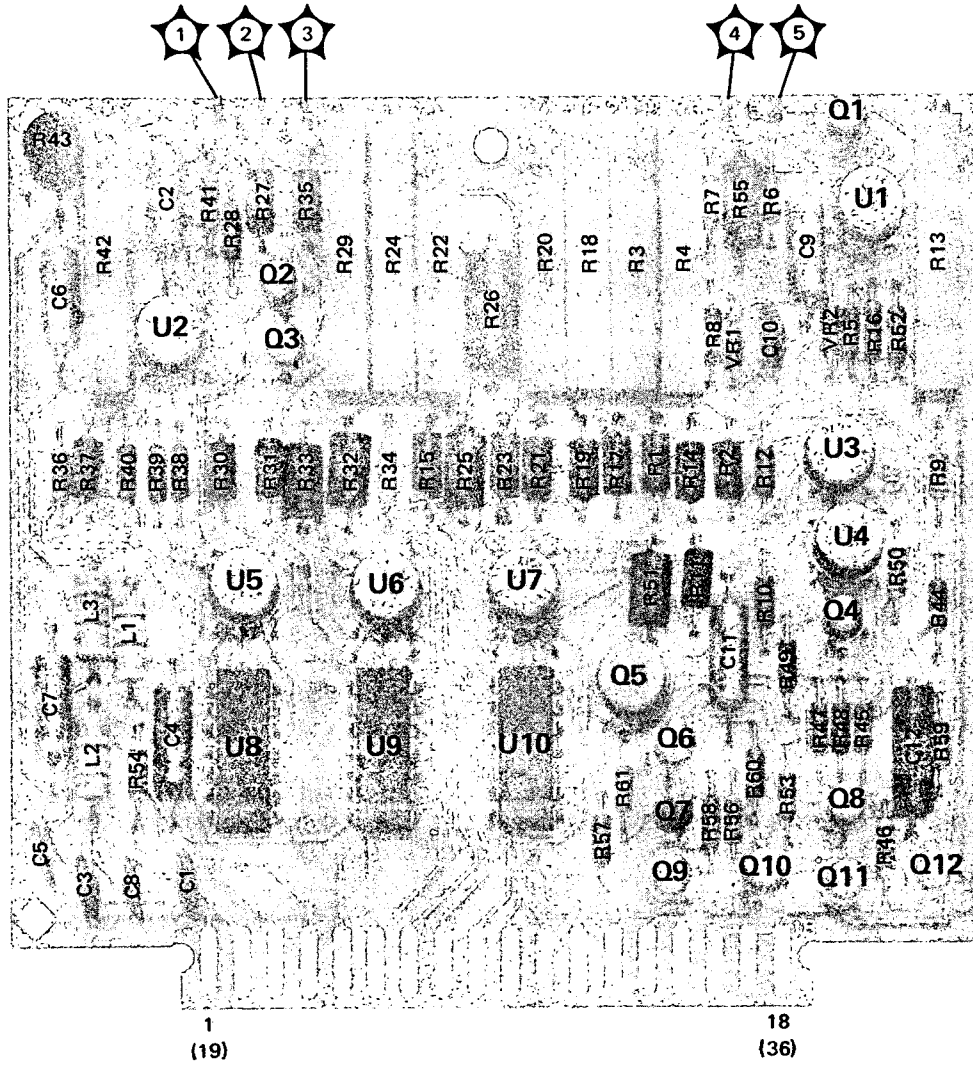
A3A5 DAC Assembly Component and Test Point Locations
